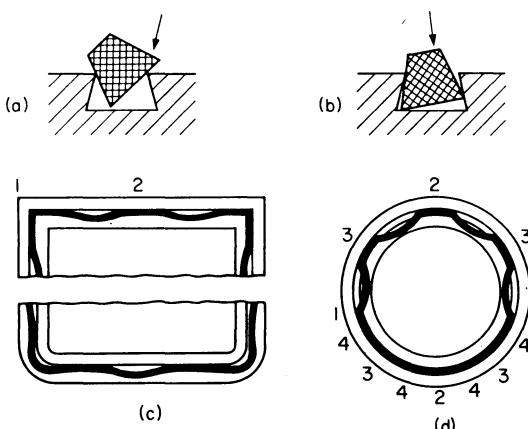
Technique of placing the gasket in a dovetail groove: (a, b) pushing the gasket into the groove; (c, d) sequence of positioning the gasket
